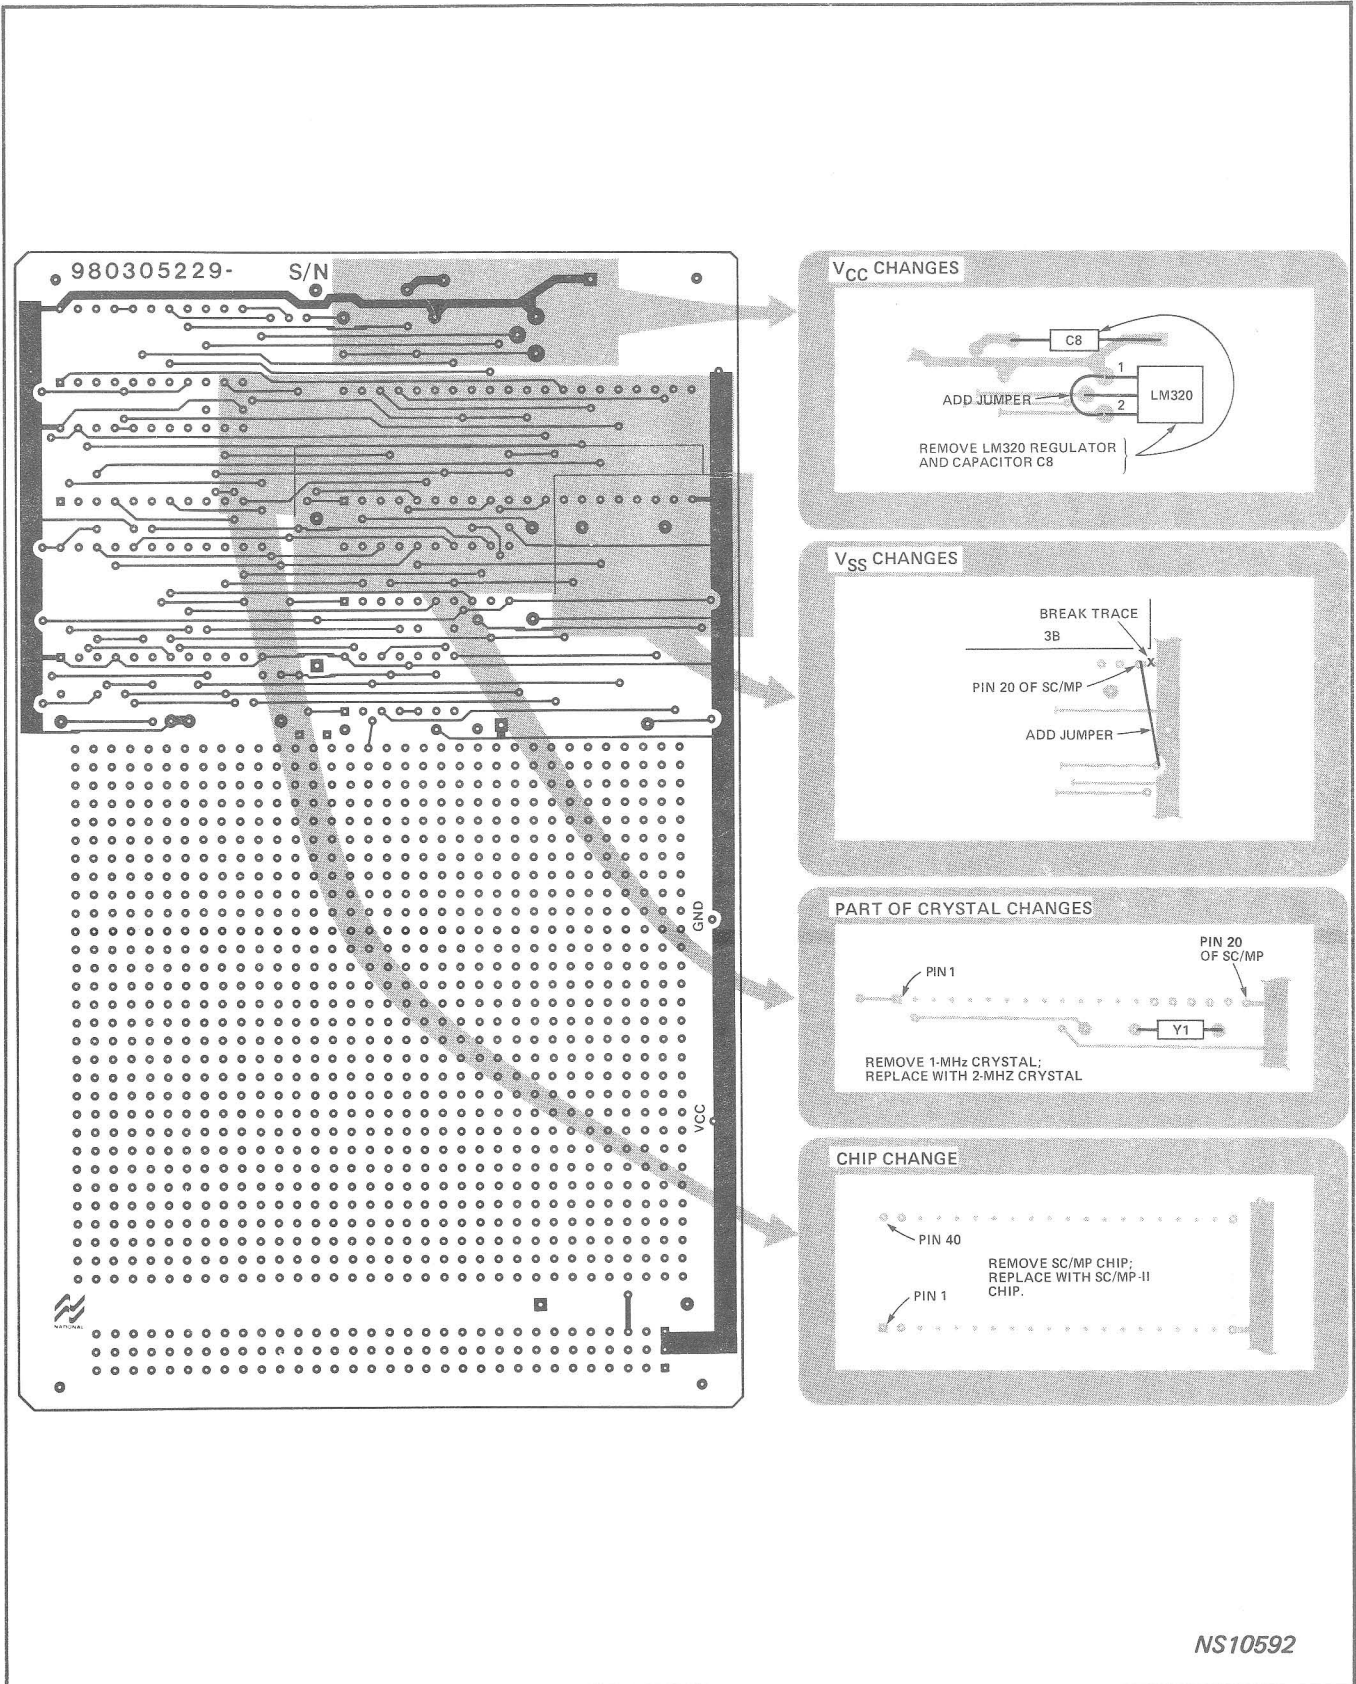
Retrofitting Component Side of PC Board #551305229-001A for SC/MP-II Microprocessor Chip
